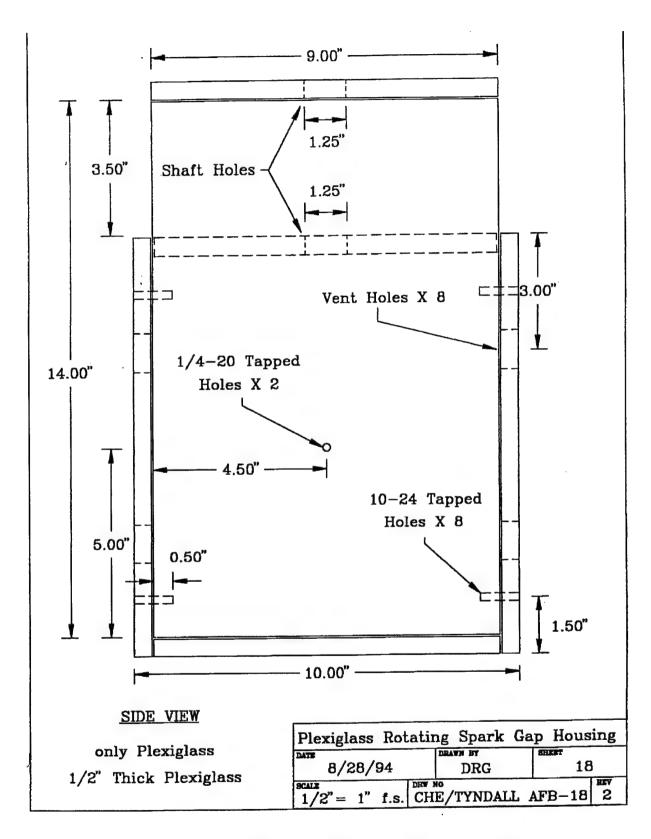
Plexiglas Rotating Spark Gap Housing - Side View (only Plexiglas)
